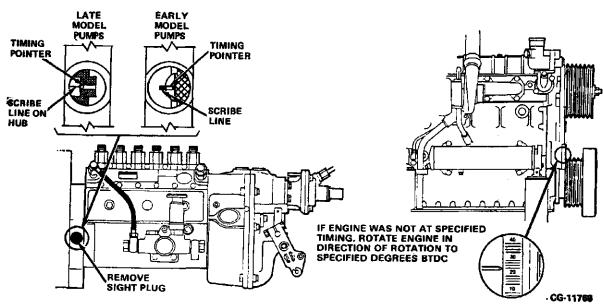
Injection Pump to Engine Timing (Prior to Pump Removal) (PES6A Injection Pump Shown)
